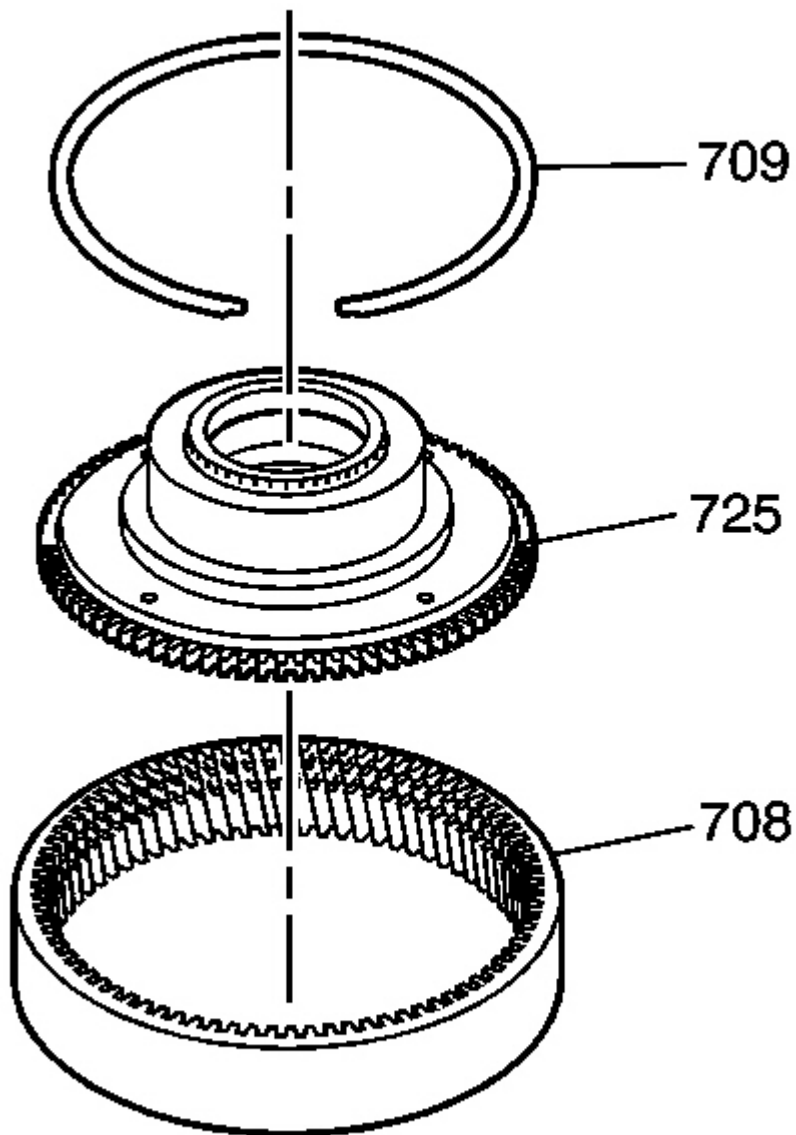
Locating Input Internal Gear, Snap Ring And Input Internal Gear Flange
